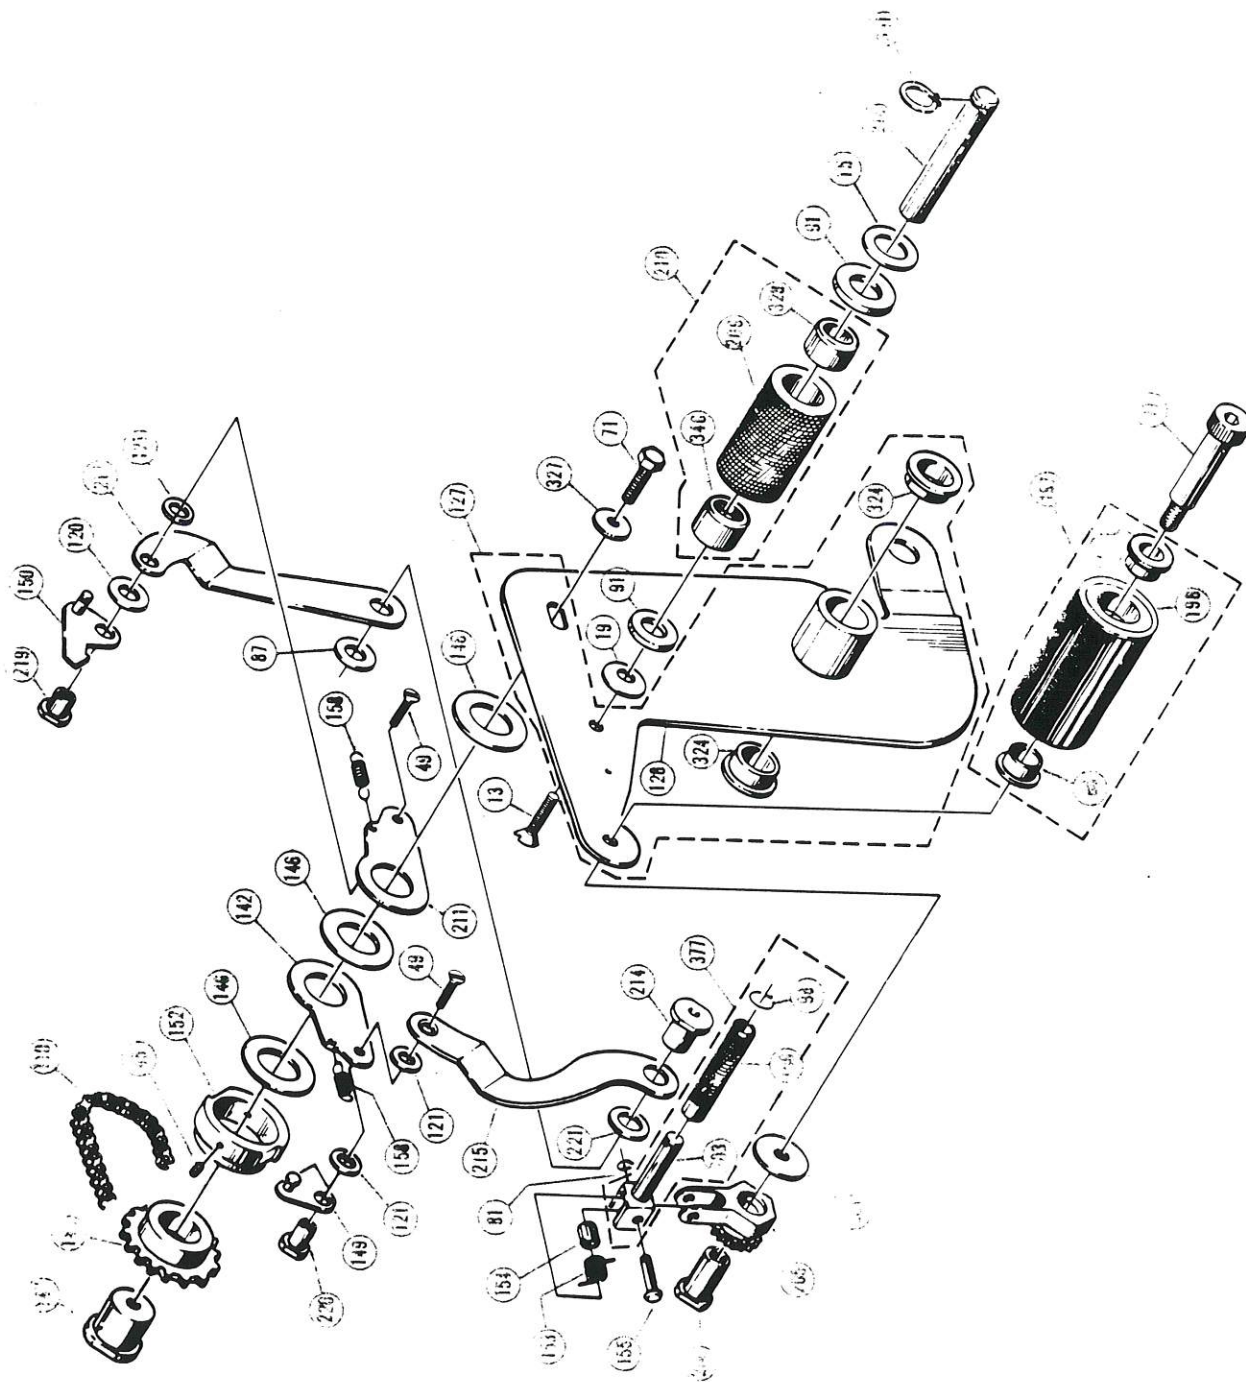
APPLYING ARM ASSEMBLY - LOWER TAPING HEAD
